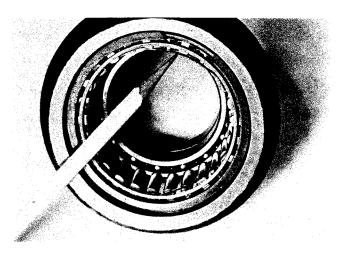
Install sprag assembly retainer ring. Note drag strips at top.
